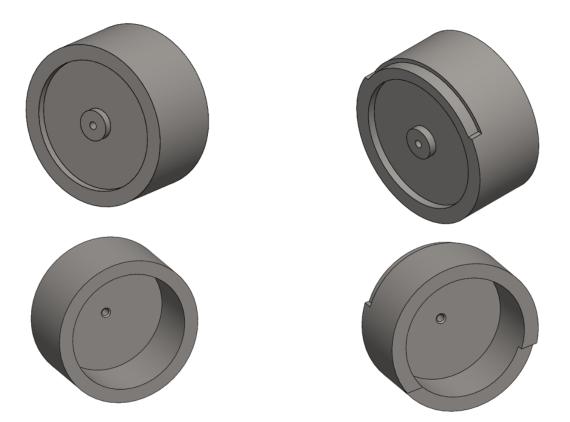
Original Wheel CAD vs. Balanced Wheel CAD
